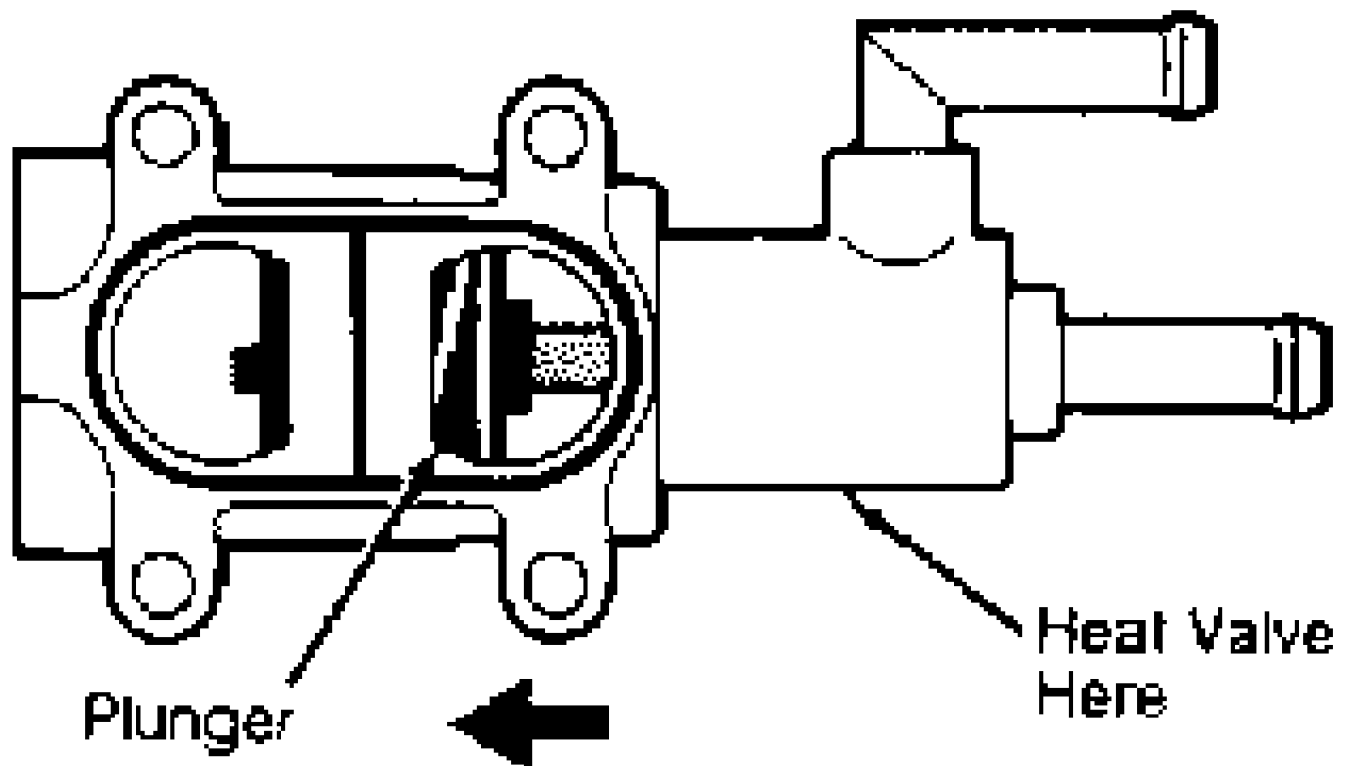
Cross-Sectional View of Air Valve (Miata, Protege & 323)
